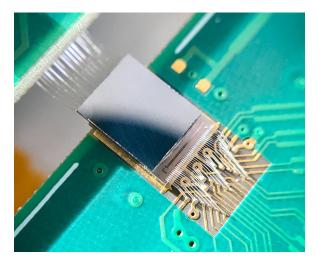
Capacitively coupled assembly of C3PD (top) and CLICpix2 (bottom), wire bonded on the PCB.
